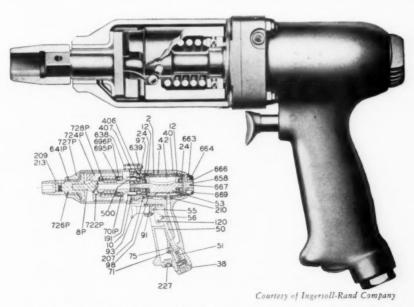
Cutaway section and details of the I-R size 504 impact wrench. Of specific interest herewith are parts No. 22 and 24, the rotor bearings; No. 71, the oiler adjusting screw; No. 75, the oiler feed; and No. 227 the oil chamber plug.
